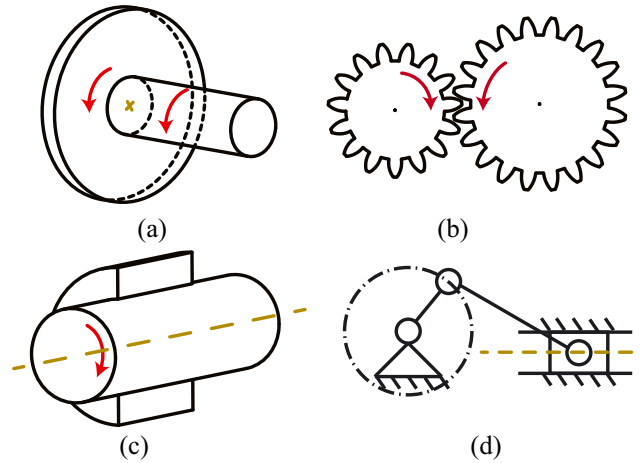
Joint types connecting two parts. (a) Fixed joint. (b) Gear-to-gear joint. (c) Revolute joint. (d) Sliding joint
